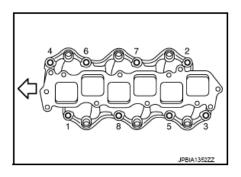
Intake Manifold Mounting Bolt Tightening Sequence Courtesy of NISSAN NORTH AMERICA, INC.
